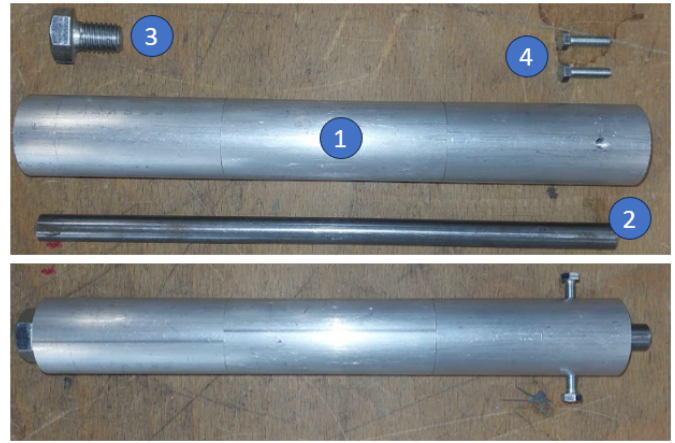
Third high-pressure melting setup: 1. Compressing Pipe, 2. Compressing Rod, 3. Closure Bolt for Sealing One End of the Pipe, 4. Locking Screws to Secure the Compressing Rod.
